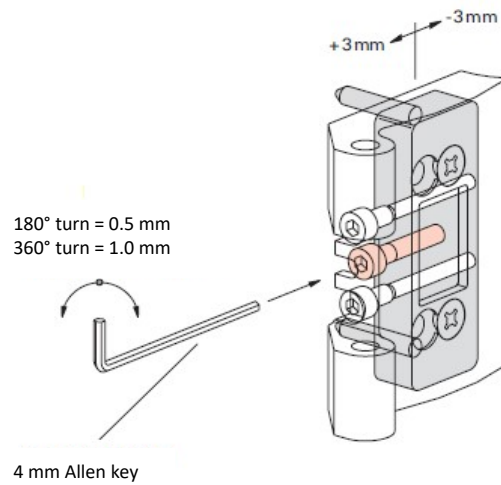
Adjusting ROTO Patio 6080 with an Allen key
